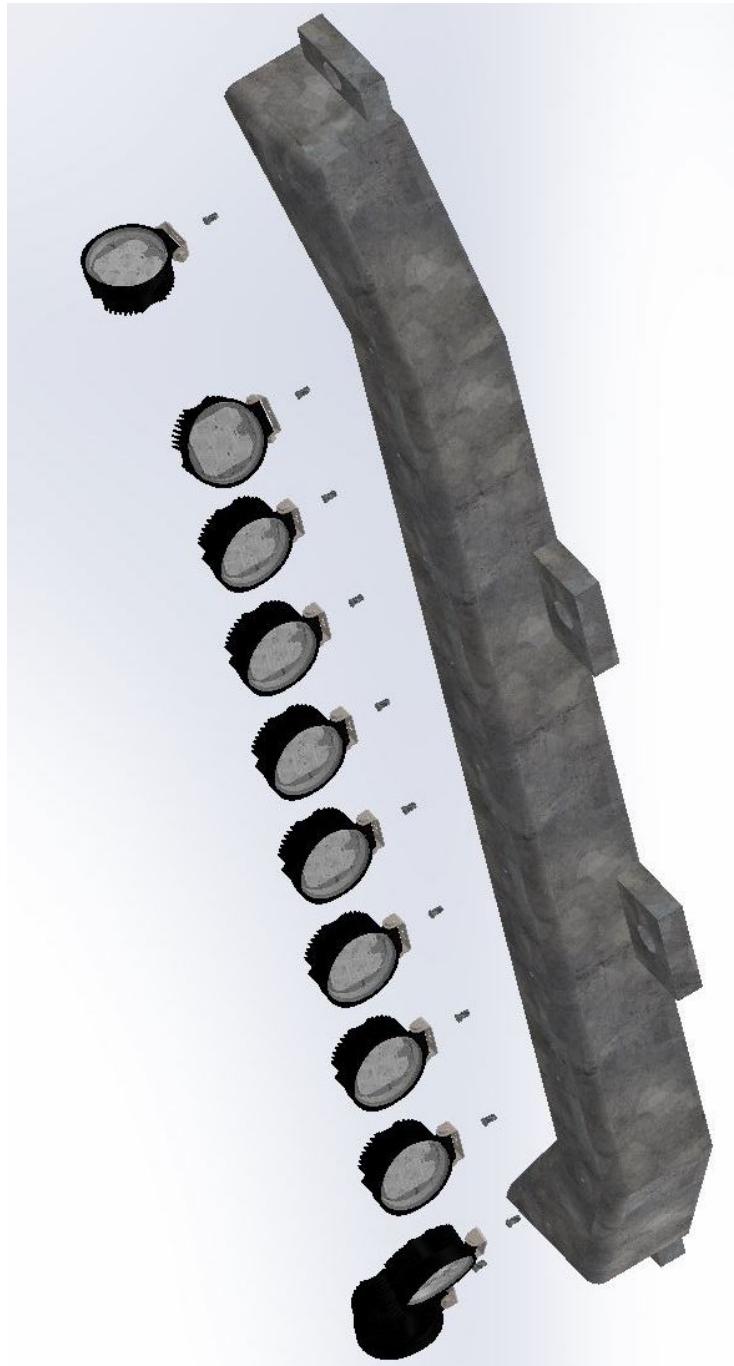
Sackett, Justin: Exploded View of Light Assembly
